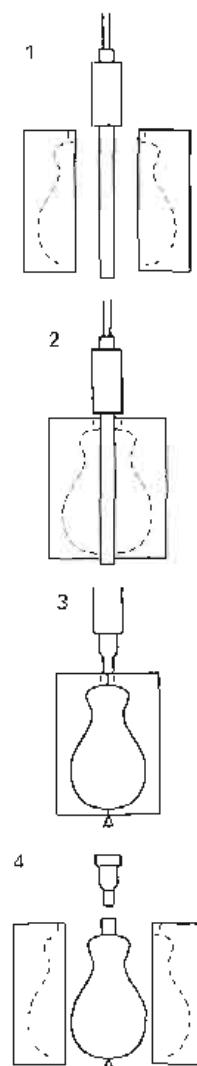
Steps in blow molding plastic parts: (1) a tube of heated plastic is placed in the open mold; (2) the mold closes over the tube, simultaneously sealing the bottom; (3) air expands the tube against the sides of the mold; and (4) after sufficient cooling, the mold opens to release the product.
